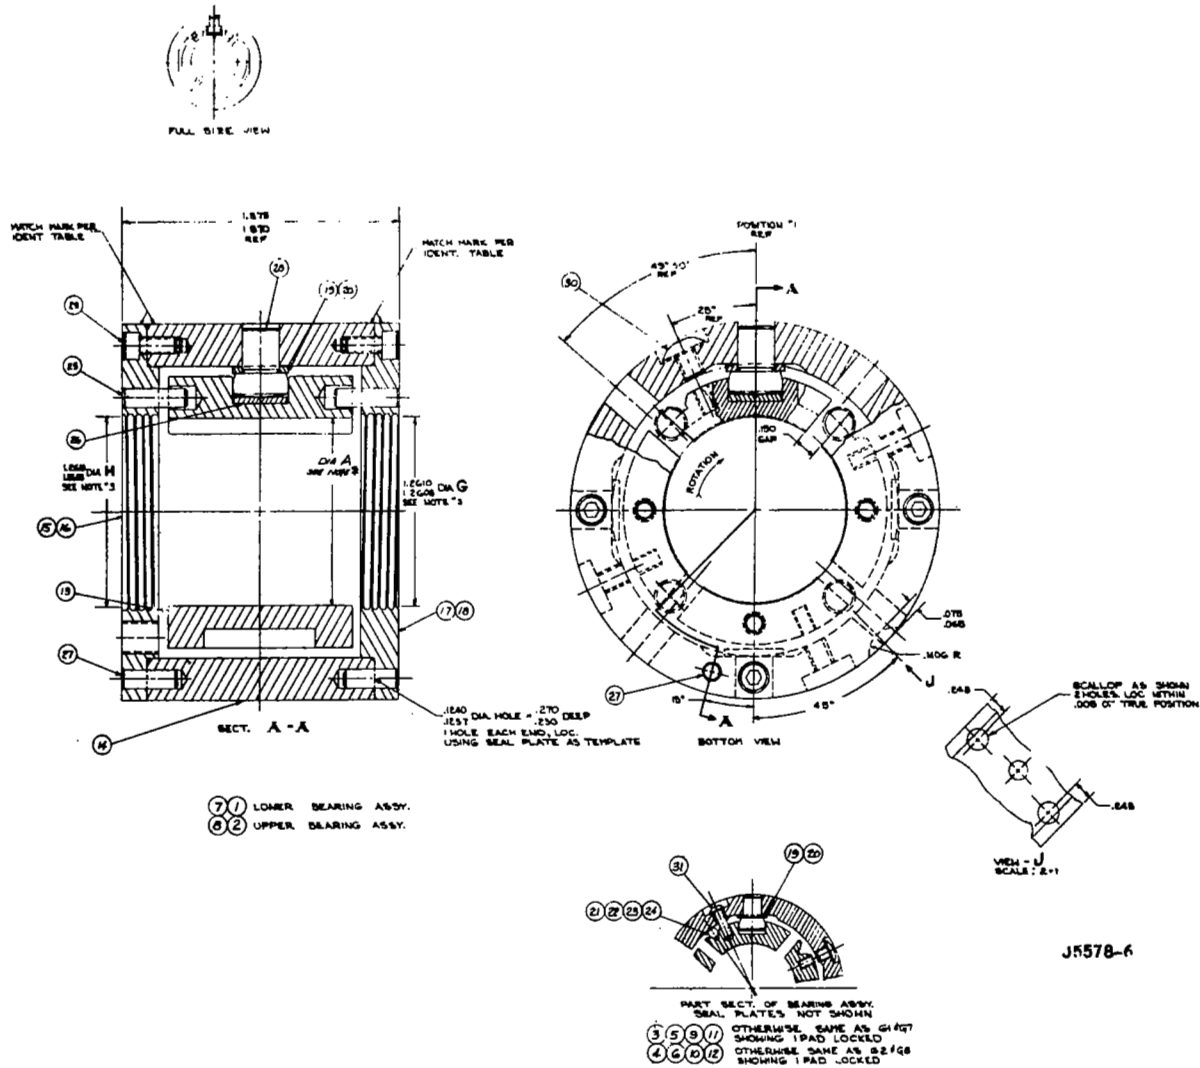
Self-Aligning Pivoted Pad Bearing Assembly.
